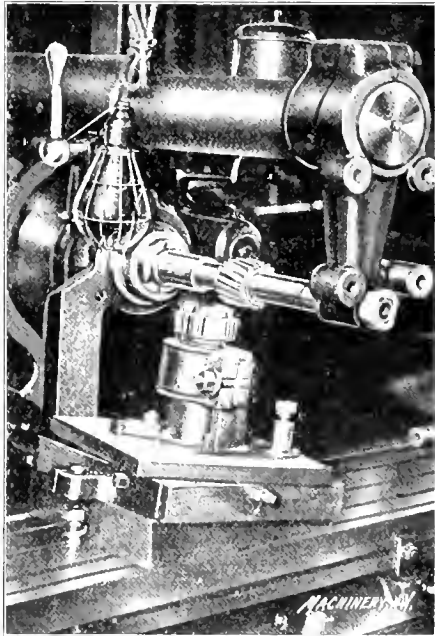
Milling the Clearance on the Clutch Teeth of a Drive-gear Sleeve
